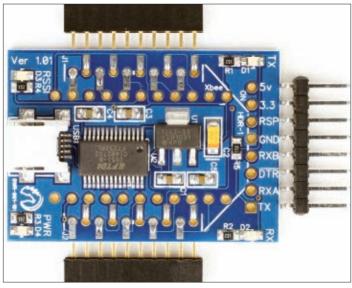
Mounting the pins at HDR-1 is optional. However, attaching the pins allows you to use the FlashFly base module in tandem with the FlashFly RS-232 adapter board to form a USB-to-RS-232 converter.
